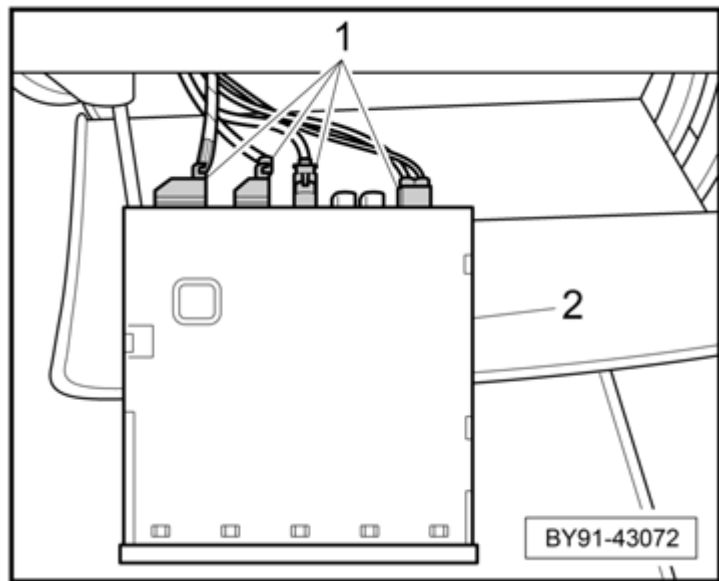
RSE Control Unit - Removal of Electrical Connectors
